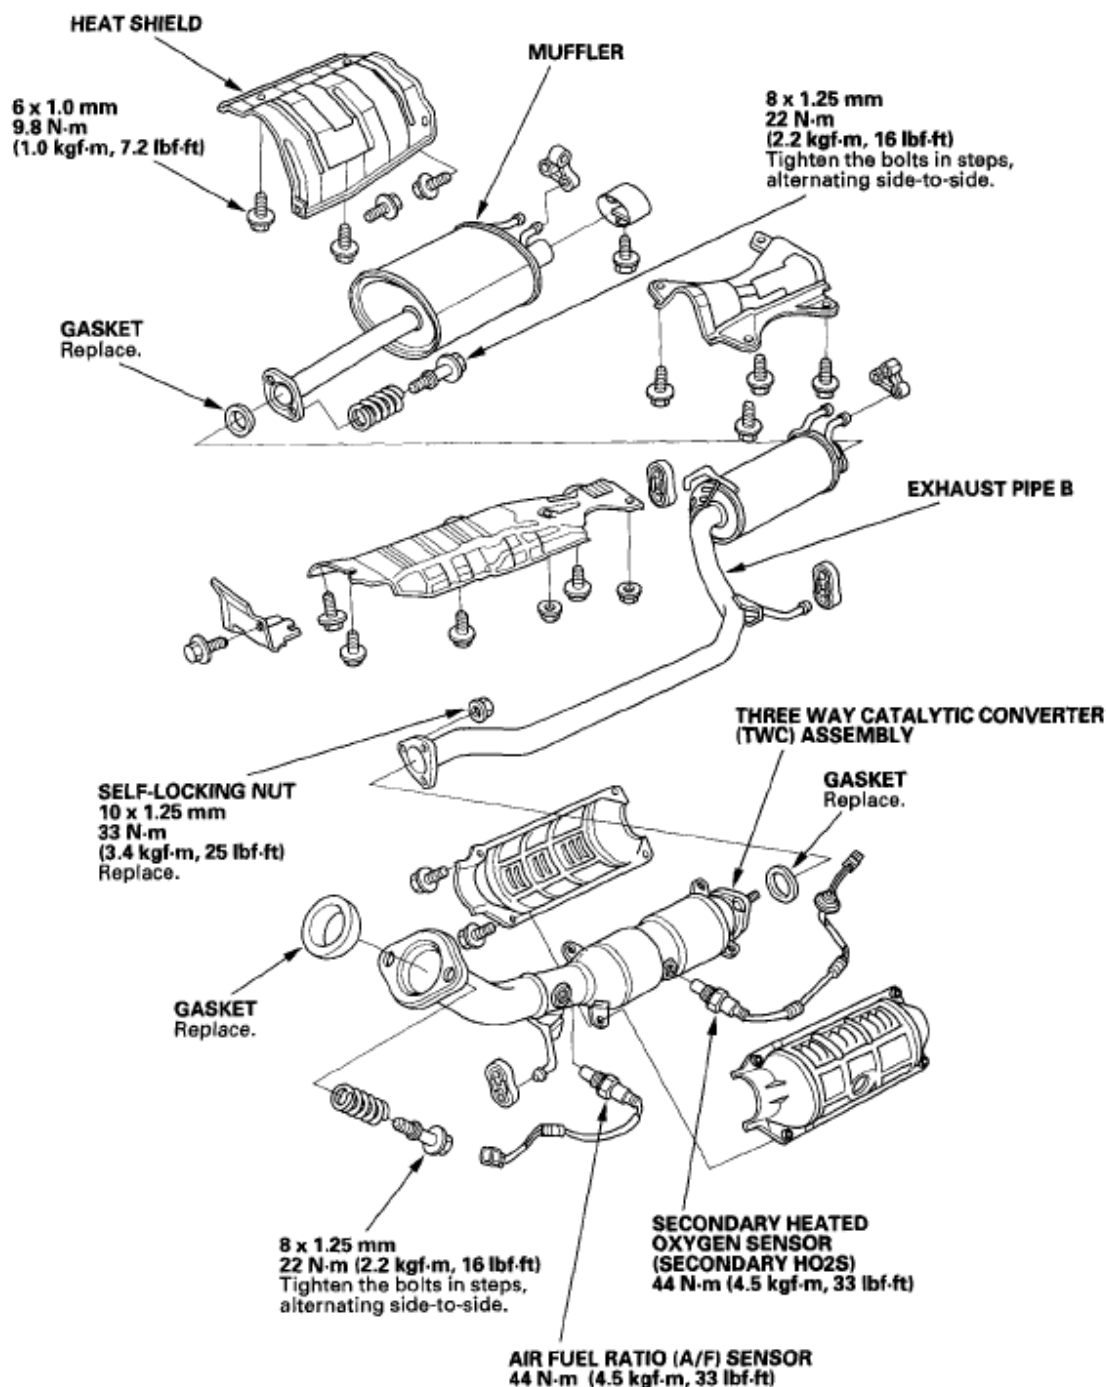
Exploded View Of Exhaust Pipe And Muffler (With Torque Specifications)
